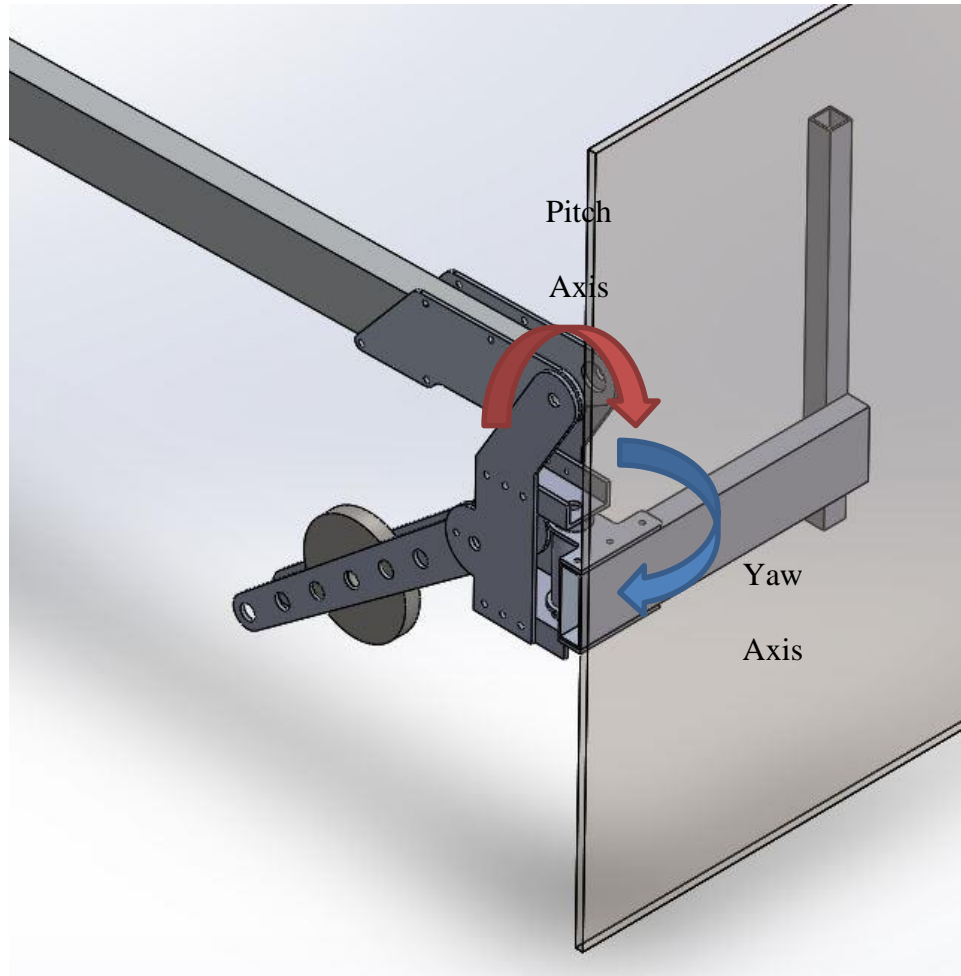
Head assembly consisting of pitch axis and yaw axis.
